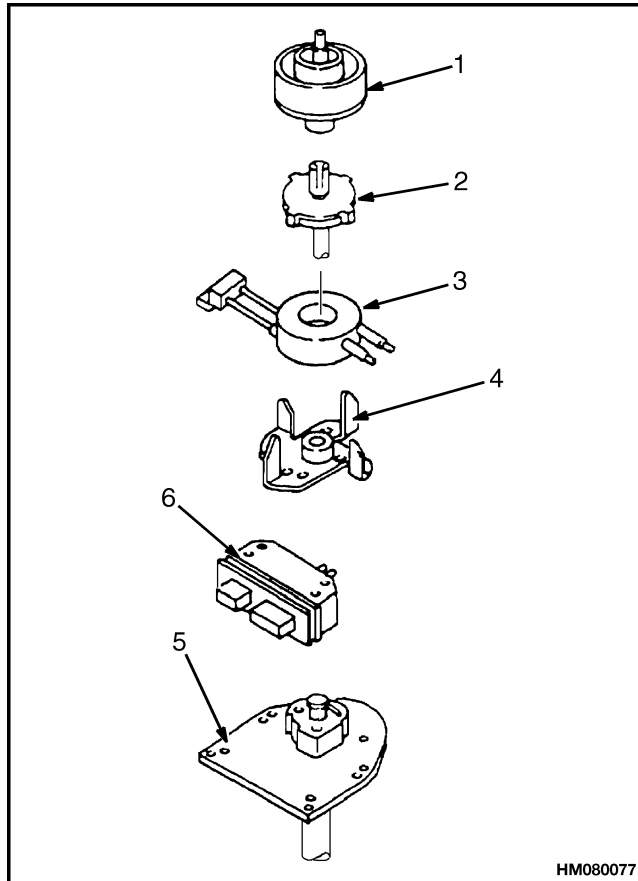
Distributor Parts GP/GLP/GDP16-20AF/BF (GP/GLP/GDP030-040AF/BF), GC/GLC030-040AF, and GLP/GDP16-20AF (GP/GLP/GDP030-040AF)
